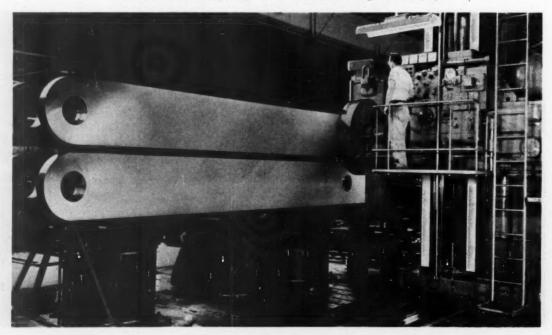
Keyways in this large steel mill roll are cut by means of an angular milling attachment mounted on the underarm of a horizontal boring machine. V-blocks support the roll.
